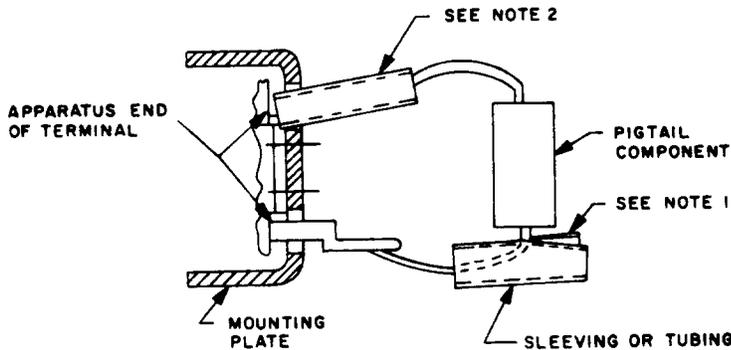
Sleeving of Pigtail Lead Connections to Apparatus Terminals
